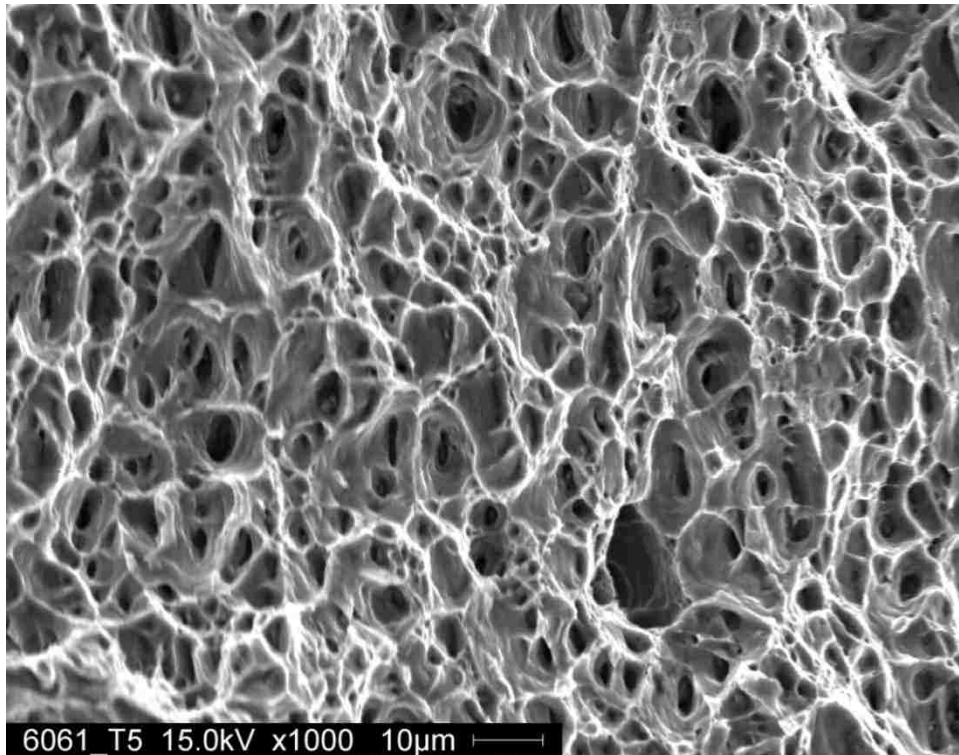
Fractograph of the tensile specimen of T5 welded cast alloy A356.
